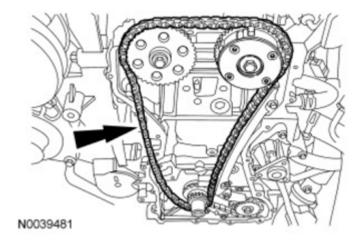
Locating Timing Chain Courtesy of FORD MOTOR CO.
